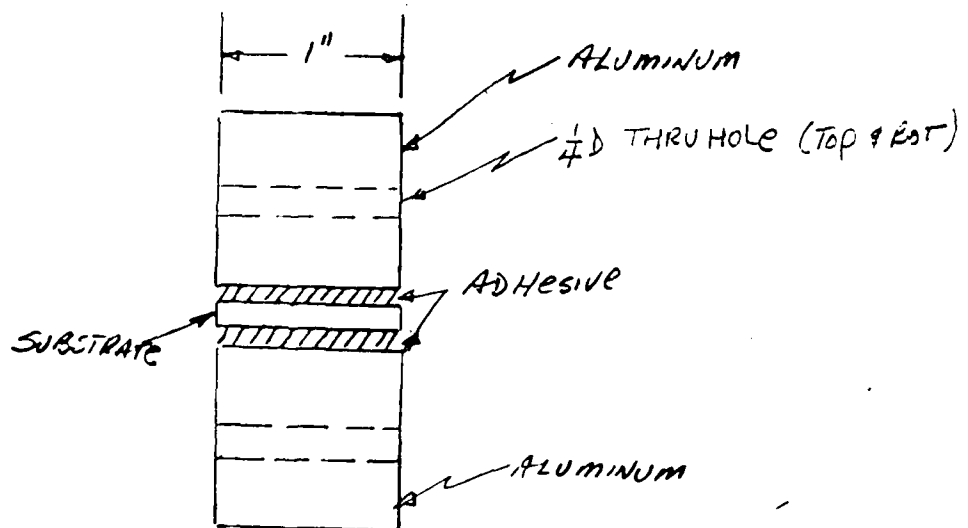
ASSEMBLY OF TENSION SPECIMEN
